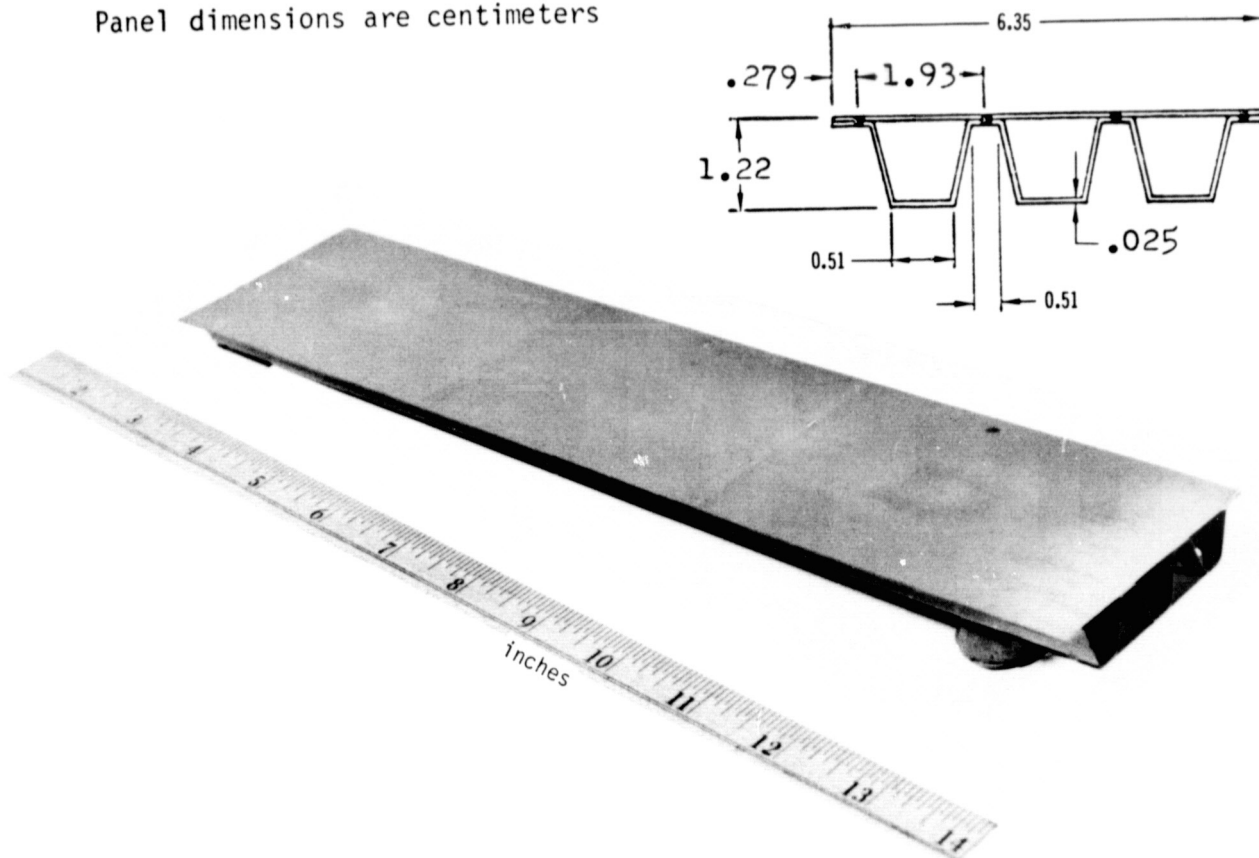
SUBSIZE PANEL TD1 CROSS SECTION AND PHOTOGRAPH AFTER TEST
